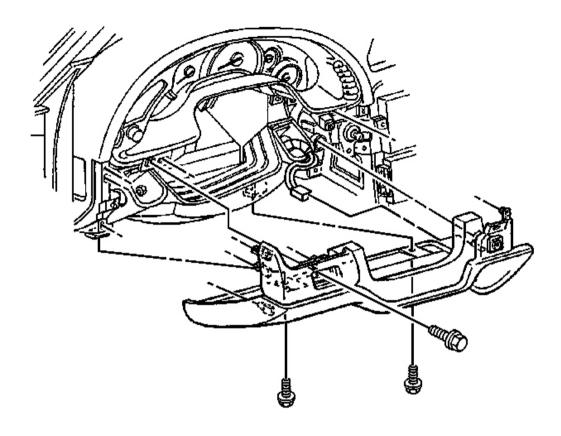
TORX(R) Head Screws, Lower Trim Cover & Driver Knee Bolster Trim Panel Courtesy of GENERAL MOTORS CORP.
